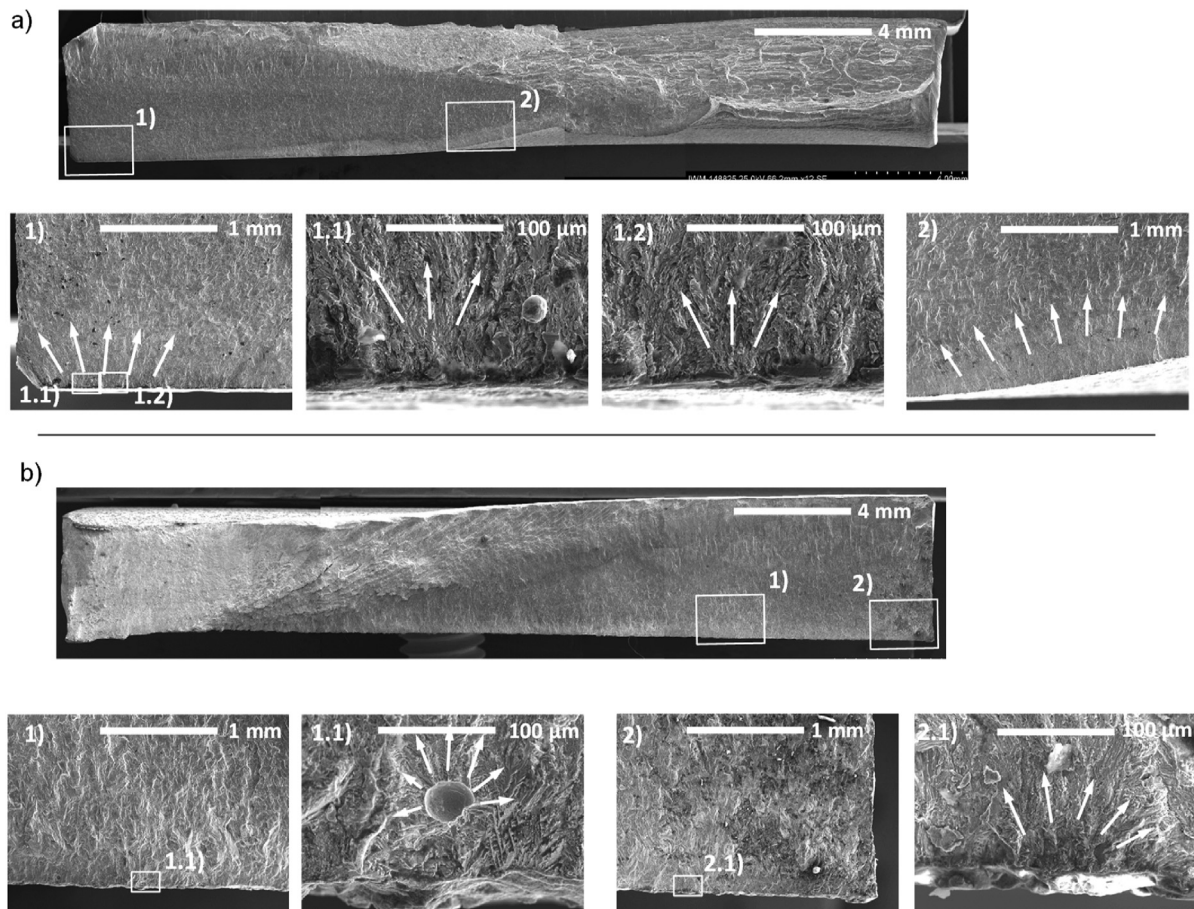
Fracture surface of welded specimen in hot-rolled condition (a) and in AM vertical condition (b).
